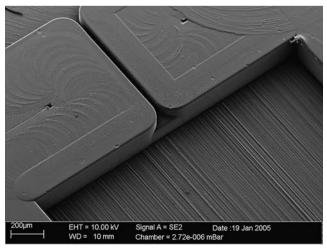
Example of a fluidic structure hot embossed with a mechanically machined master structure. Note the machining traces on the embossed surface (courtesy of E. Piechtoka, Jenoptik Laser Optik Systeme GmbH)
